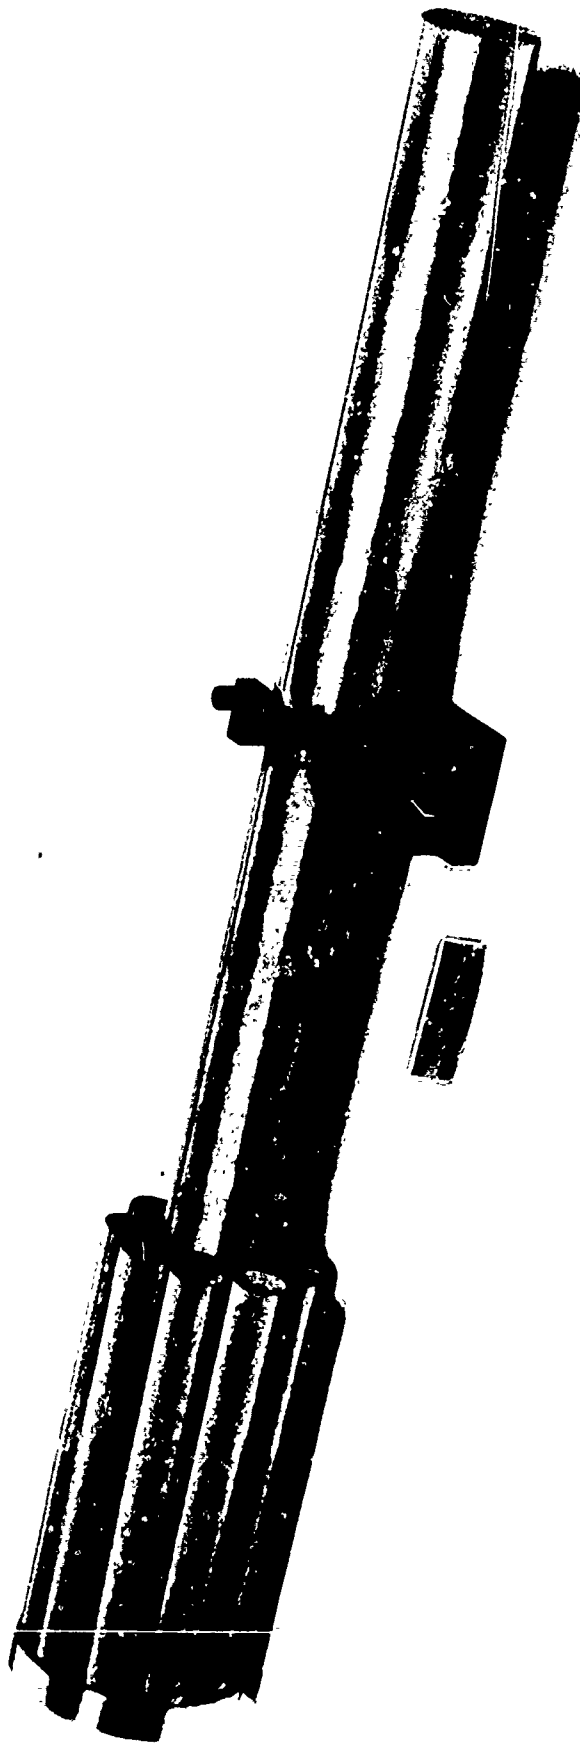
Inner Tube Assembly with One Cluster of Cartridges Attached
